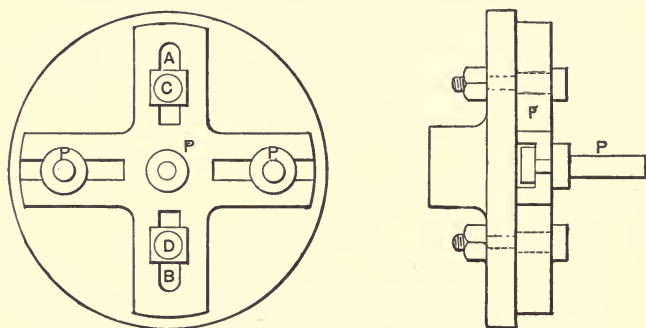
LATHE-DRIVER (FRANK CLEMENTS).
